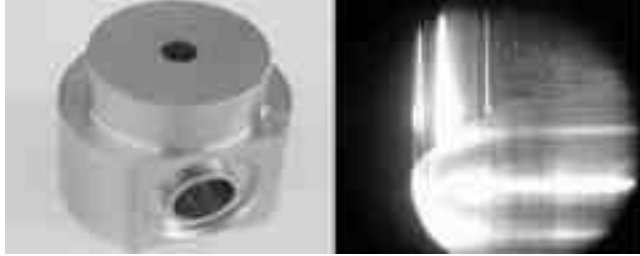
Stainless steel valve and cross-section of surface to be finished.
